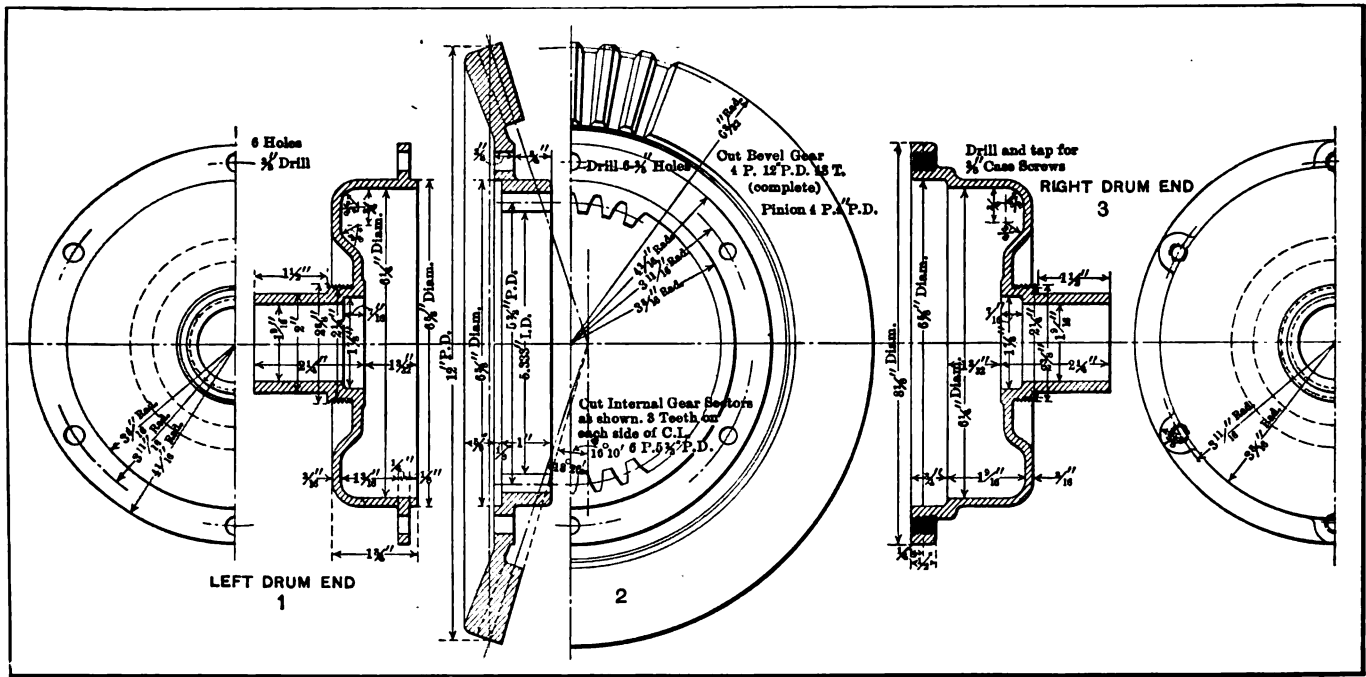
Left drum end; Fig. 2—Bevel gear; Fig. 3—Right drum end
